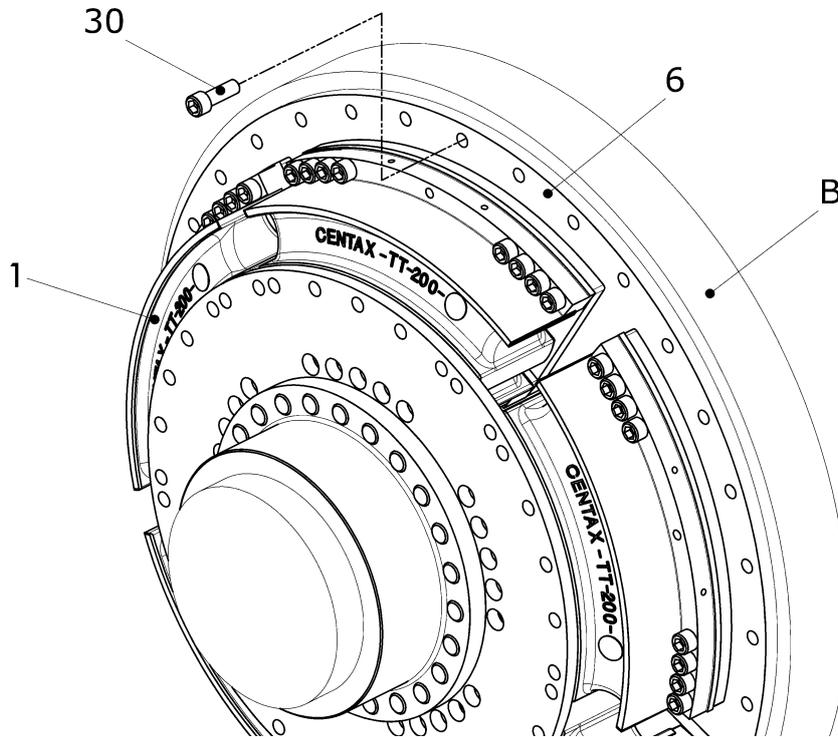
Mounting the adapter to the flywheel (type FS)
